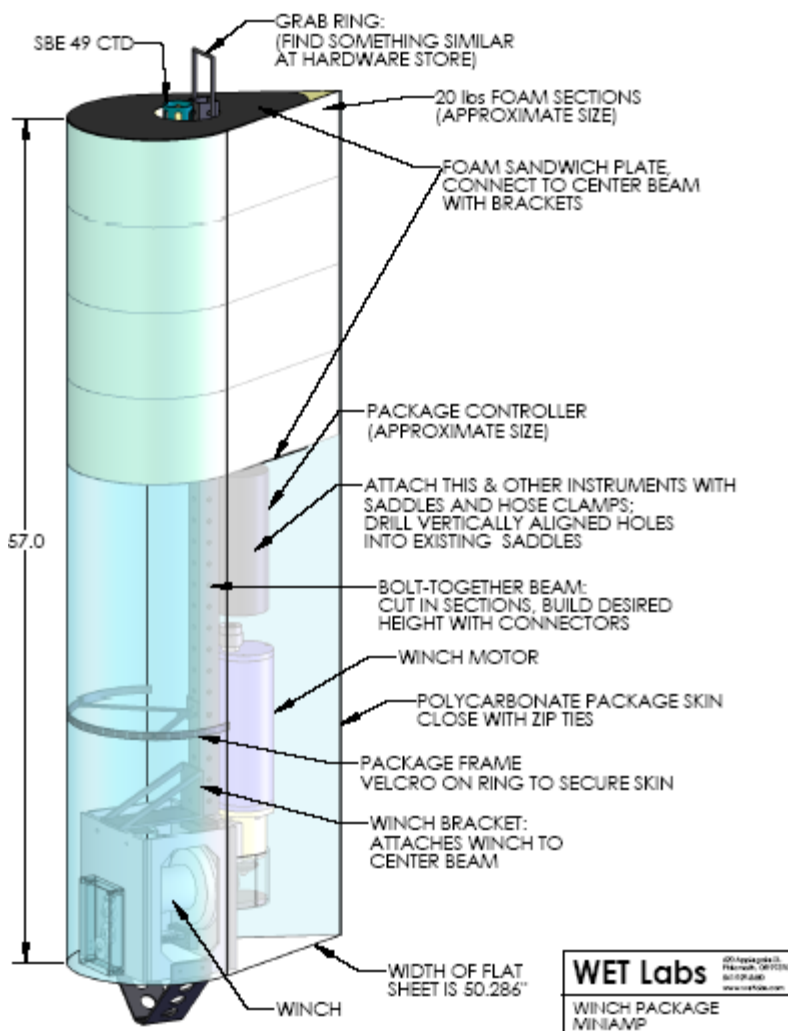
Picture of the alpha level winch system and level wind prototype to be used on the Mini AMP system. Note that this new design incorporates a right angle worm gear drive such that the winch motor can be oriented parallel to the main framing structure of the Mini AMP, while maintaining the drum alignment at the base of the center of gravity on the profiler.
